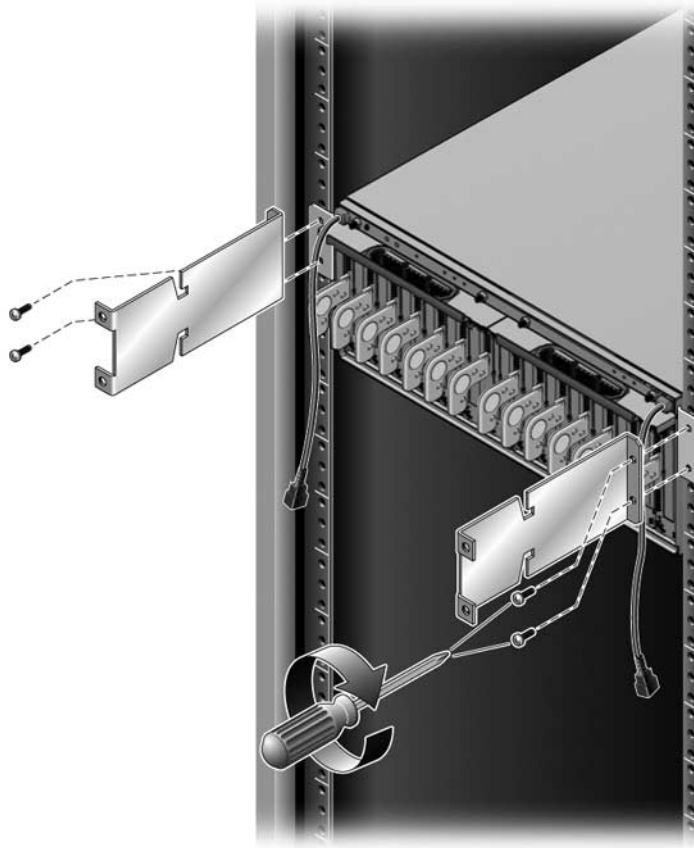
Installing the External I/O Expansion Unit in the Rack
